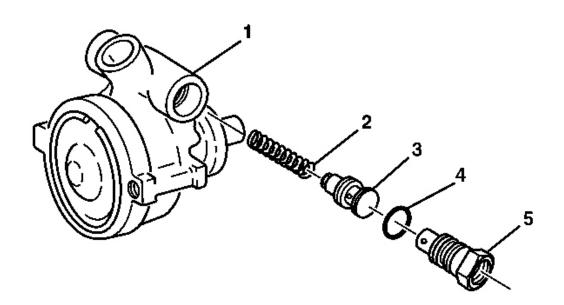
View Of Power Steering Pump Flow Control Valve Components (CB Series) Courtesy of GENERAL MOTORS CORP.
